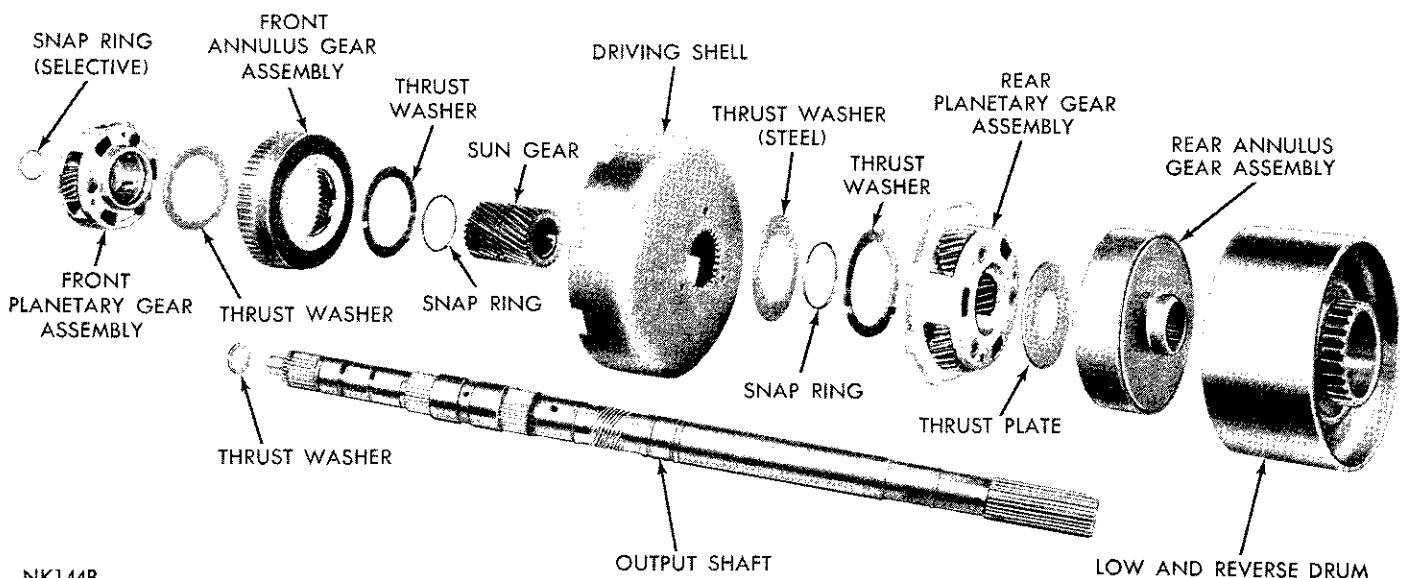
Planetary Gear Train and Output Shaft Disassembled (A-727)
